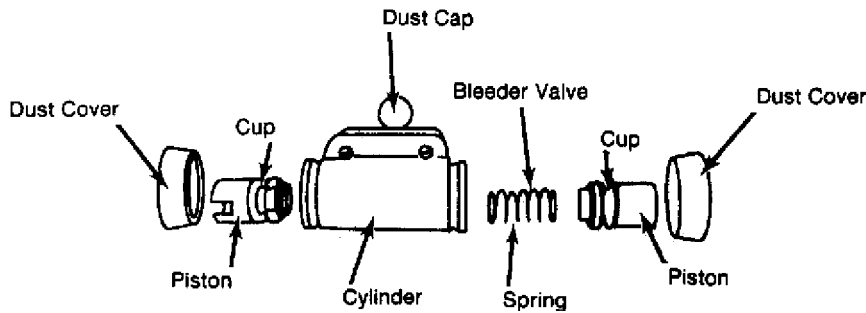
Exploded View of 320i Rear Wheel Cylinder
